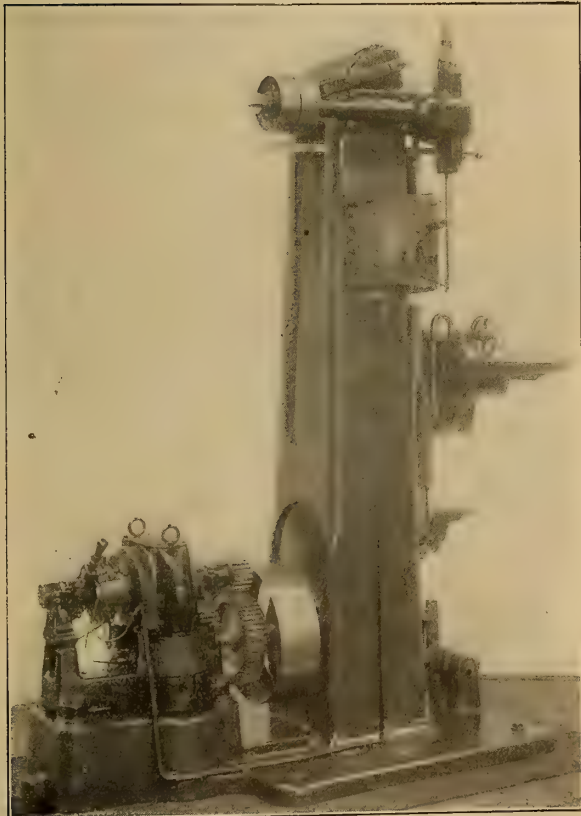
MORTISER AND BORER. FAY & EGAN CROCKER-WHEELER 2 H.P. SHUNT MOTOR GEARED TO COUNTERSHAFT. 500 R.P.M.
